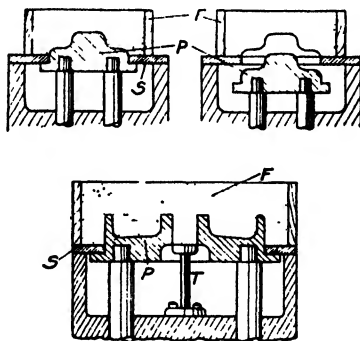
Principles of Stripper Plate Draw Operations.
